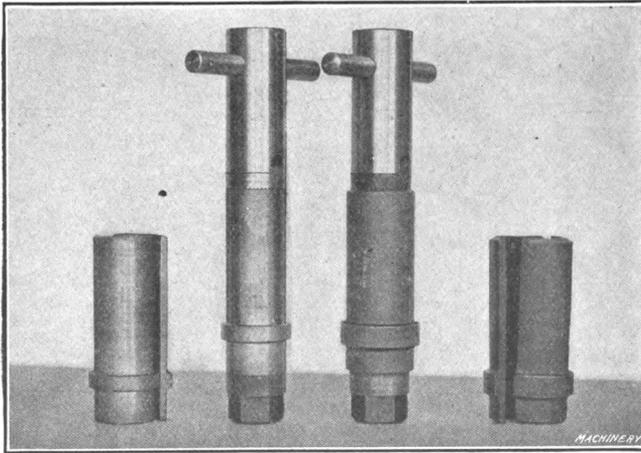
Half-bushings to be machined and Arbor used for holding them while turning Outside
